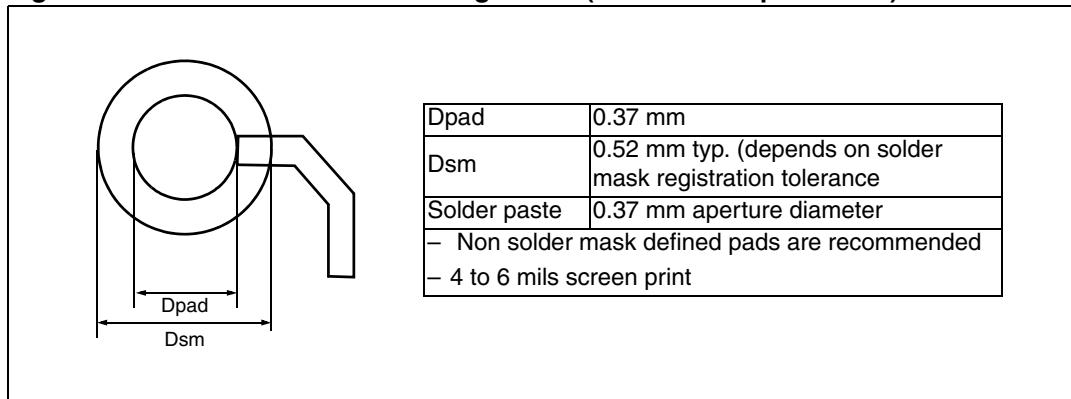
Recommended PCB design rules (0.80/0.75mm pitch BGA)
